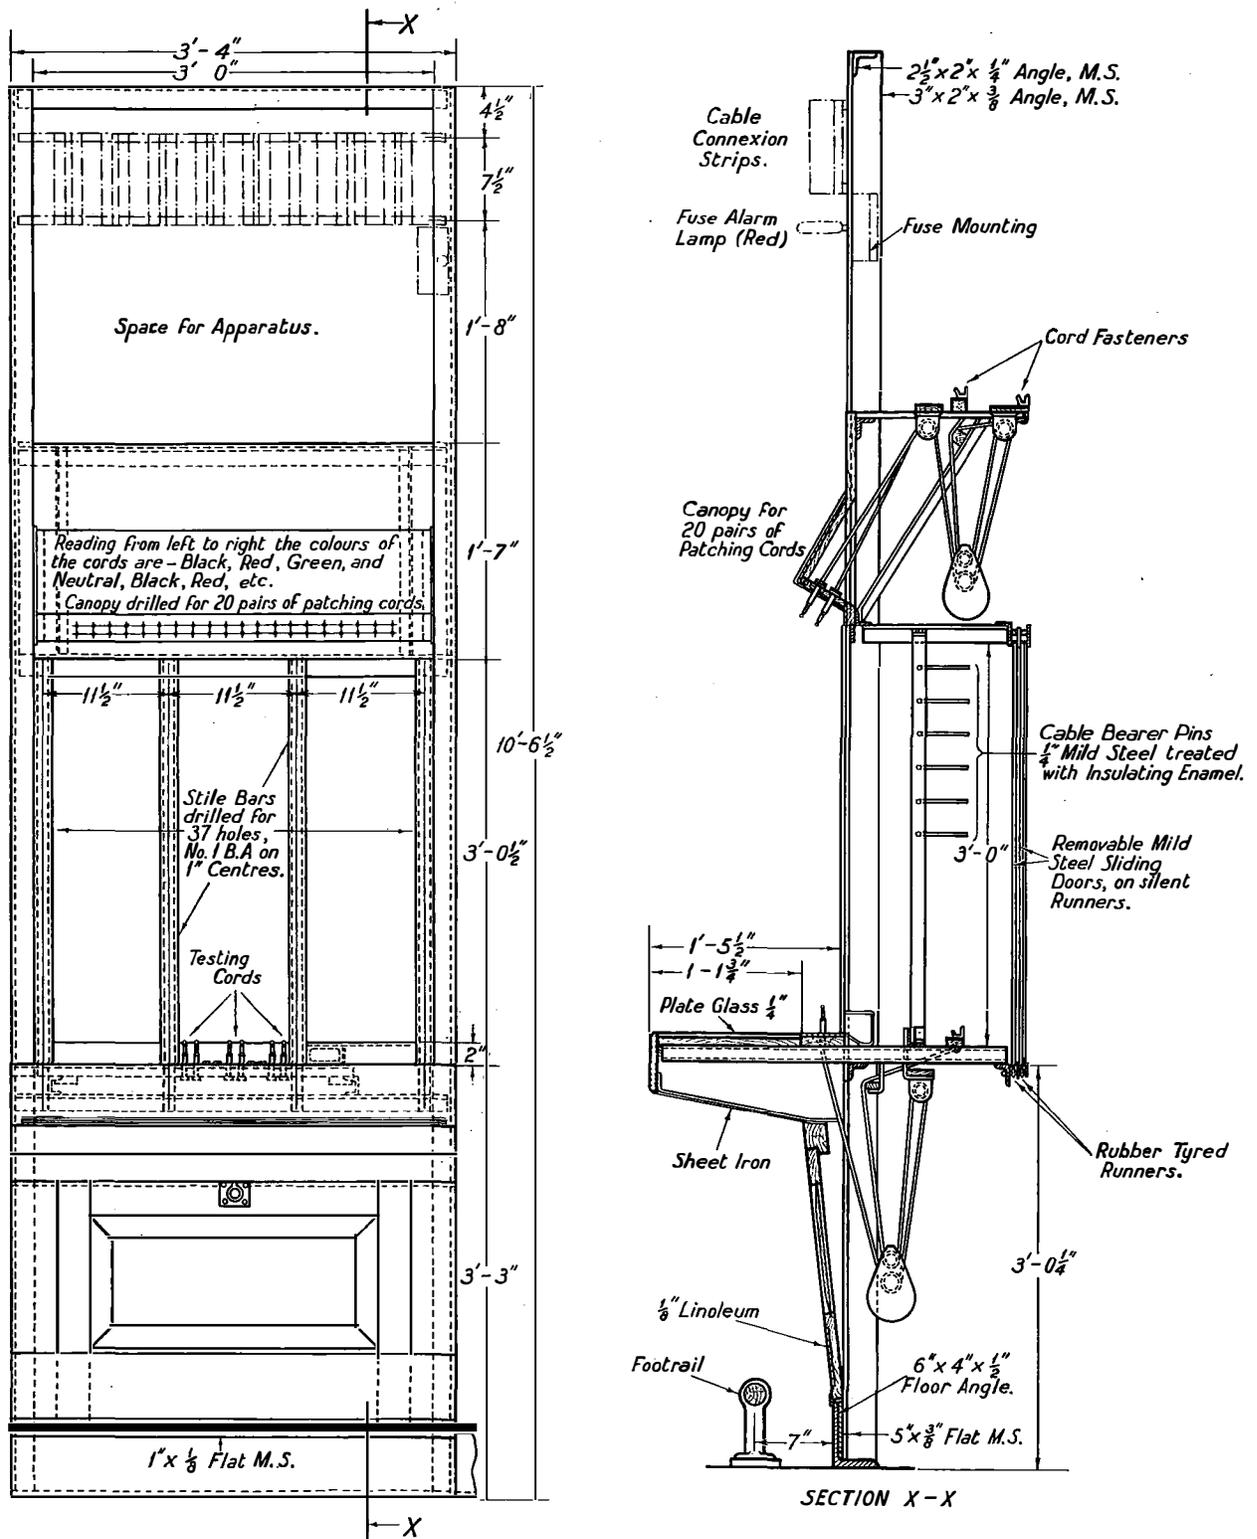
ELEVATION AND SECTION OF TEST RACK.
